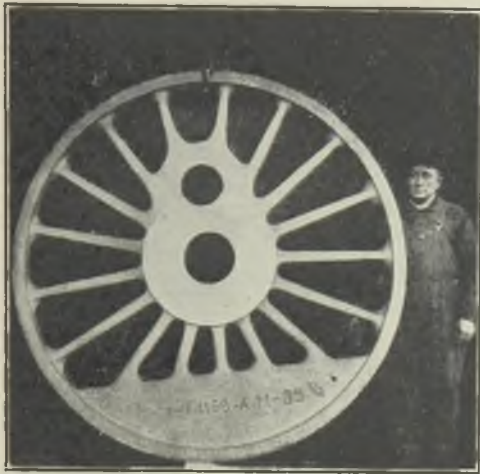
LOCOMOTIVE DRIVING-WHEEL CASTING FROM MOULD SHOWN IN FIG. 28.
